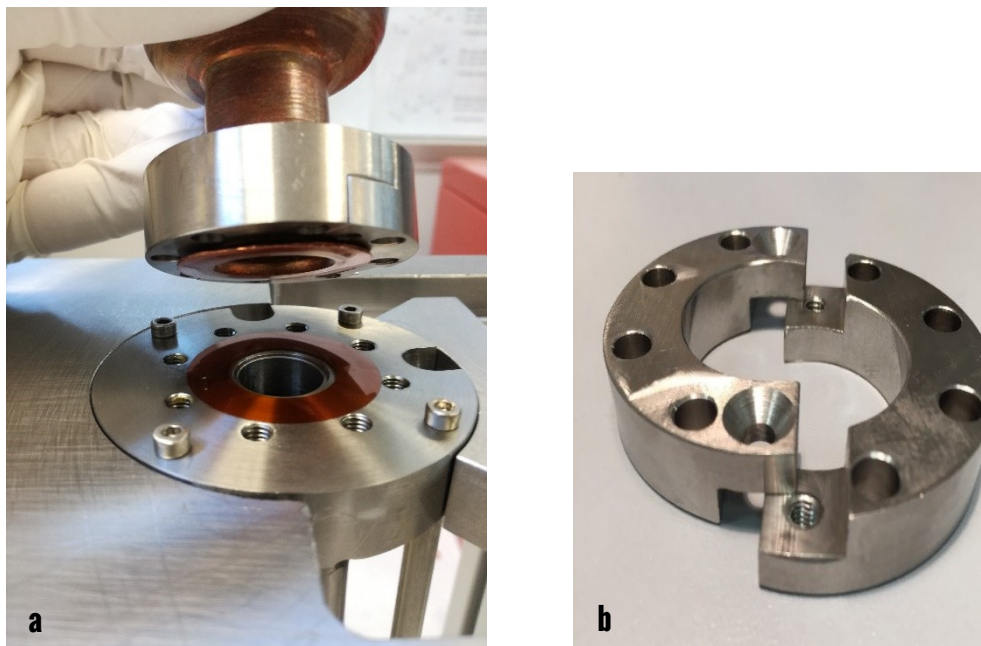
New flange design for the stand flange. This composed by two pieces, machined together. The flange is inserted in the cavity cut off and then mounted before sealing the cavity flange with kapton gasket.
